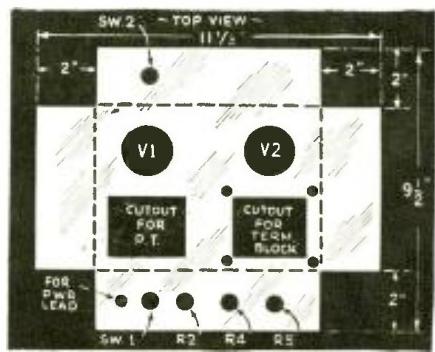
The chassis layout and drilling dimensions. The small size of the unit can be seen from this drawing.
